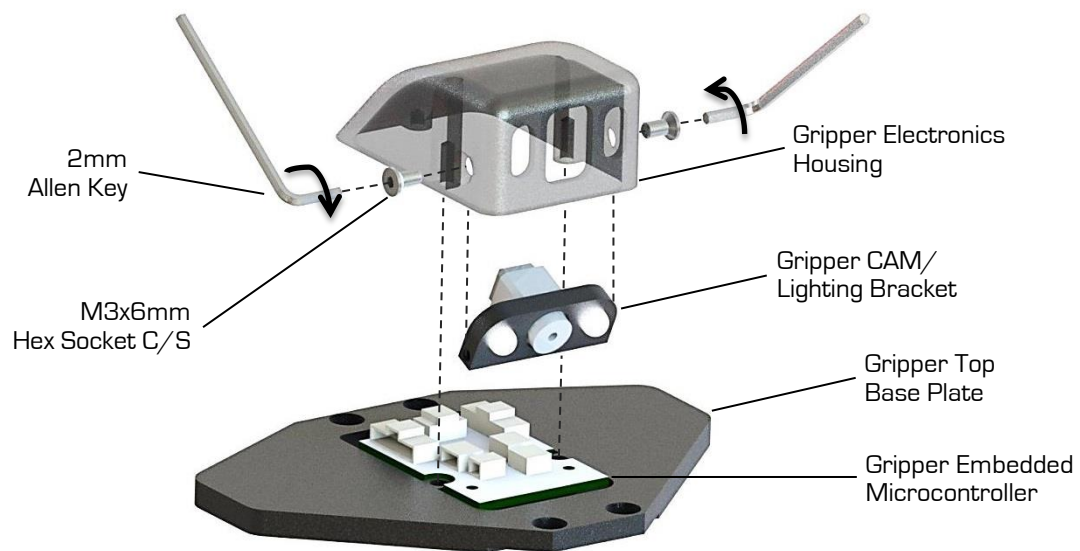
Render of Electronics Housing Showing the Adjustment of the Camera/Lighting Module
